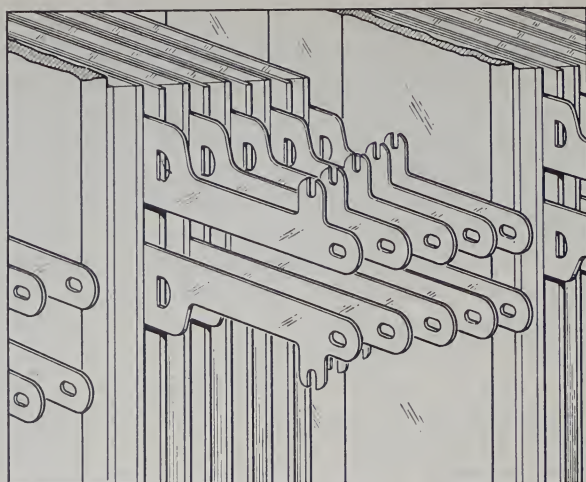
Wiring Terminals for Movable Springs of a Crossbar Switch
